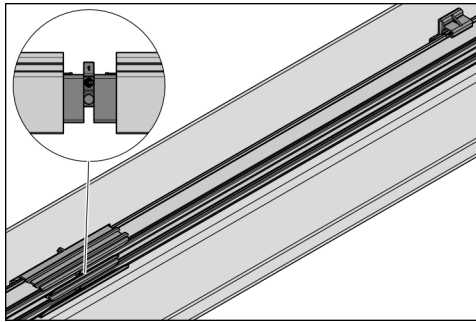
The connector pins must have a gap of approx. 2.5 mm.
